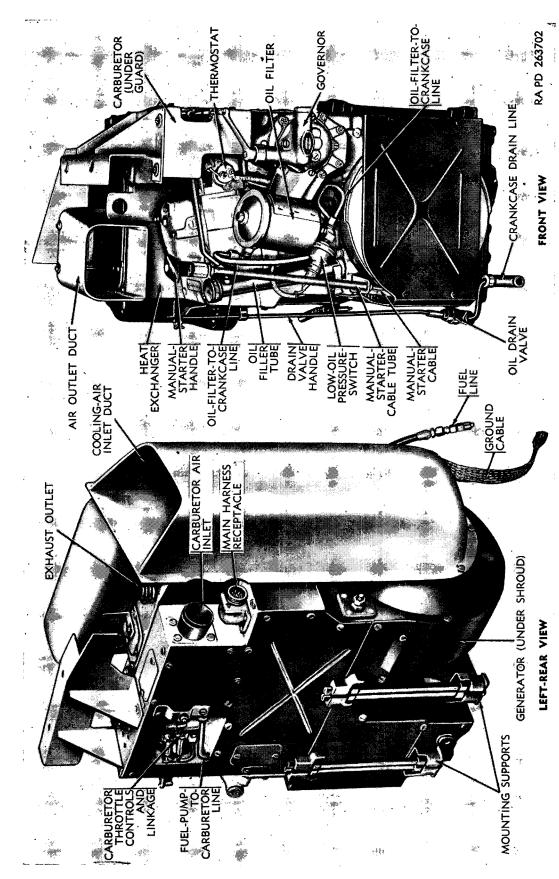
Auxiliary engine and generator for 90-mm gun combat tank.
